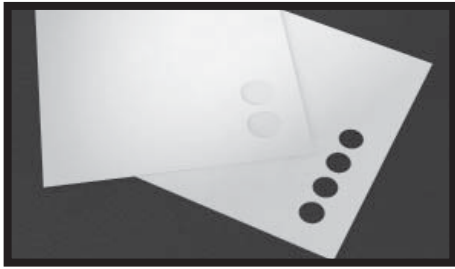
KERLITE, in all of its versions, can also be drilled using CNC machines. Drill a preliminary hole using a diamond drill bit and if necessary use a hole saw to enlarge the hole to the required dimensions. Use a drill bit with a diameter of between 4 and 8 mm. Operating speed is 40 mm/min. with spindle rotation of 900 RPM. When using these tools: cool the point drilled with water; start drilling at a low speed; never exert too much pressure and bear in mind the resistance of the type of KERLITE being worked on.
